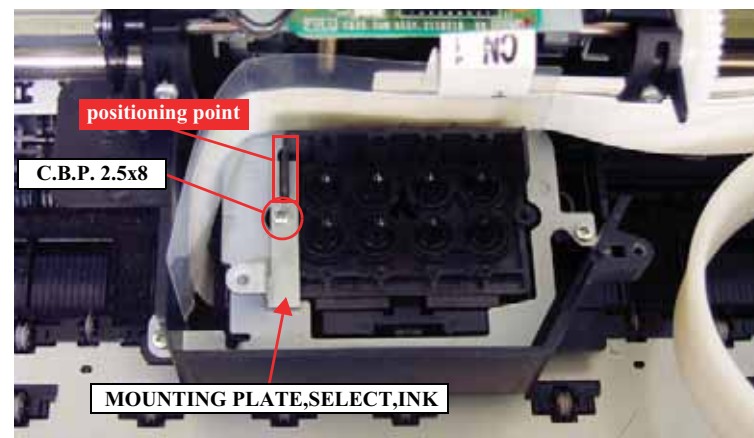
Removing the MOUNTING PLATE, SELECT, INK
